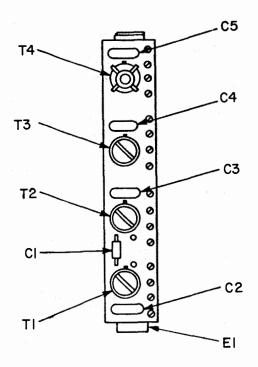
18 MHz Subassembly A2A4A8, Component Locations
